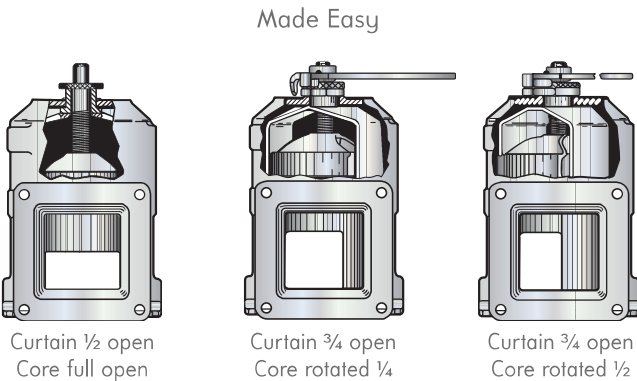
Figure A. Turning curtain adjusting knob changes port opening so valve can constitute optimum resistance in the system for good control.
